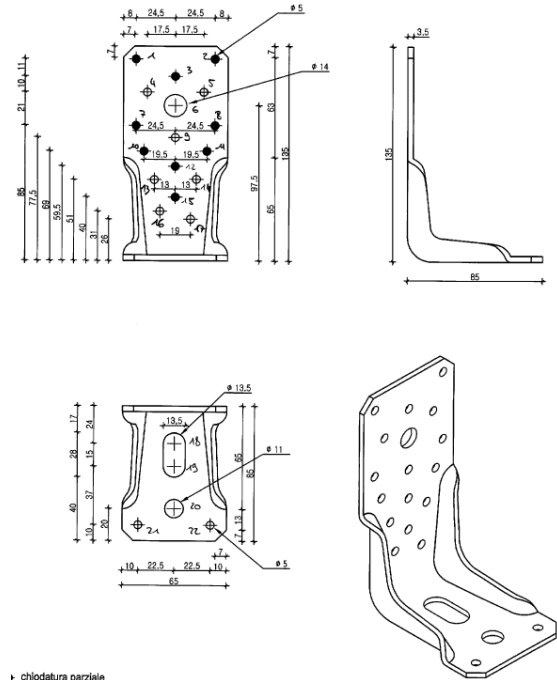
Dimensions of an angle bracket with bolt hole 65x135x85x3,5
